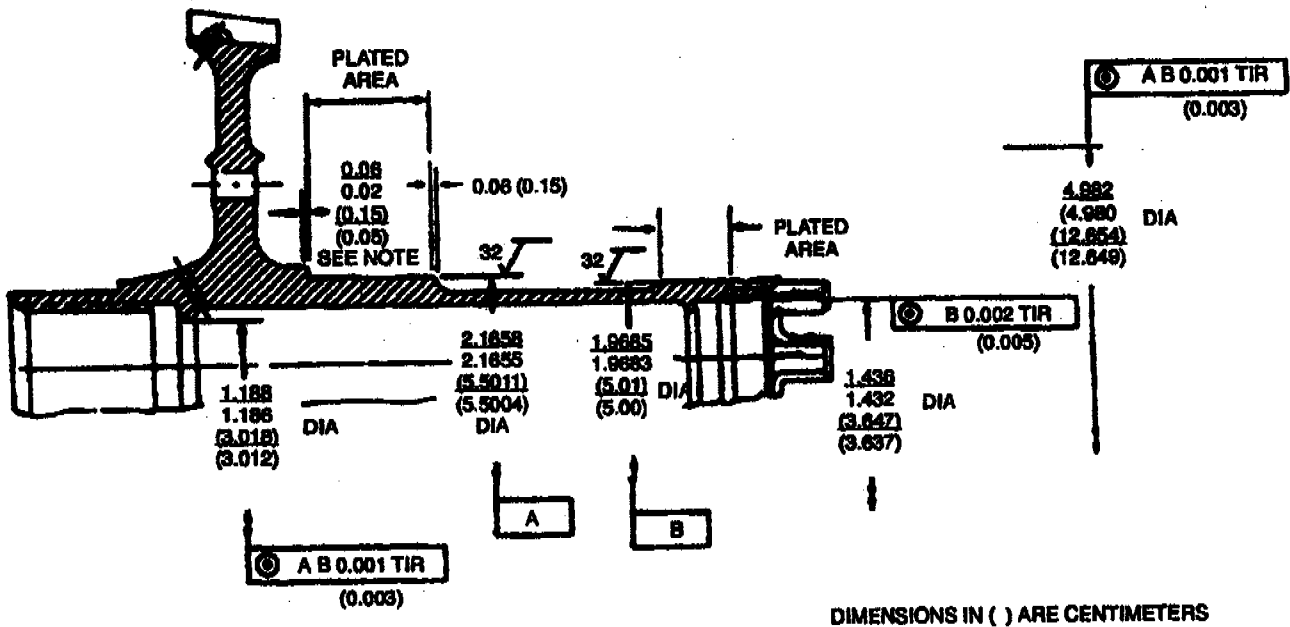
Power Turbine Rotor Bearing Journal Diameter - Plating Inspection Area.
